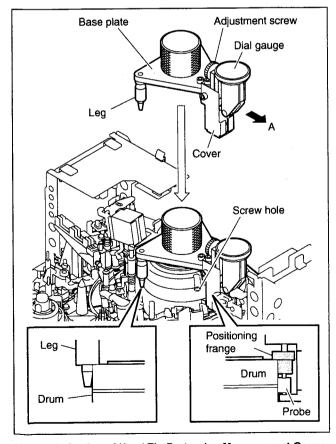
Setting of Head Tip Protrusion Measurement Gauge
